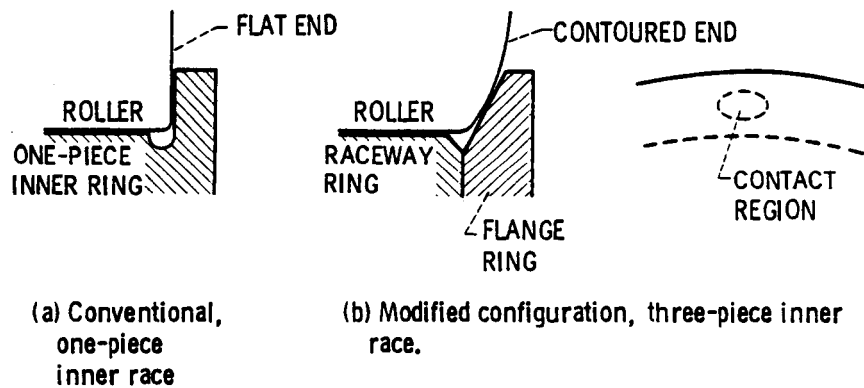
Roller end-contact geometry of one- and three-piece inner-race bearing.
